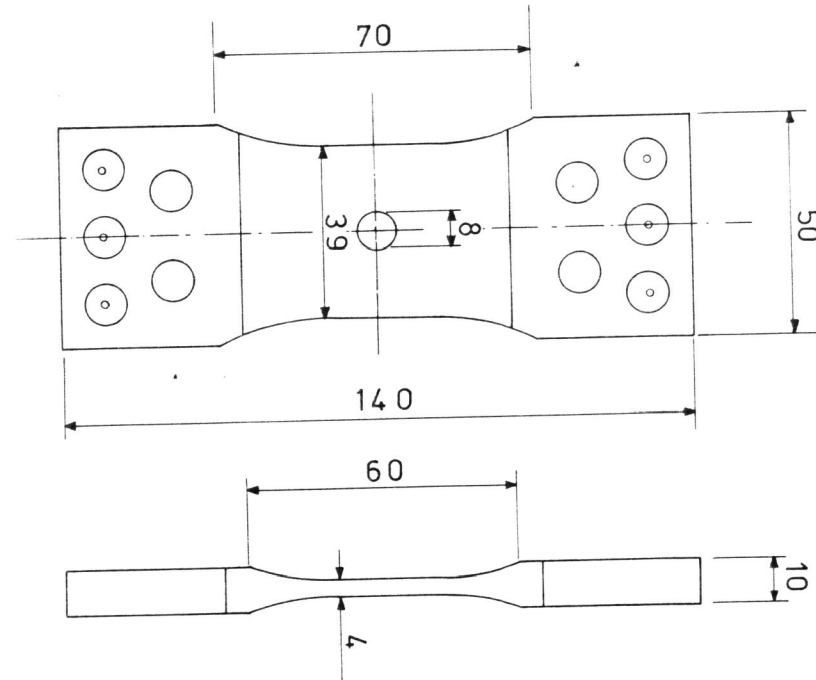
Notched Plate Fatigue Test Specimen (All dimensions in mm.)
